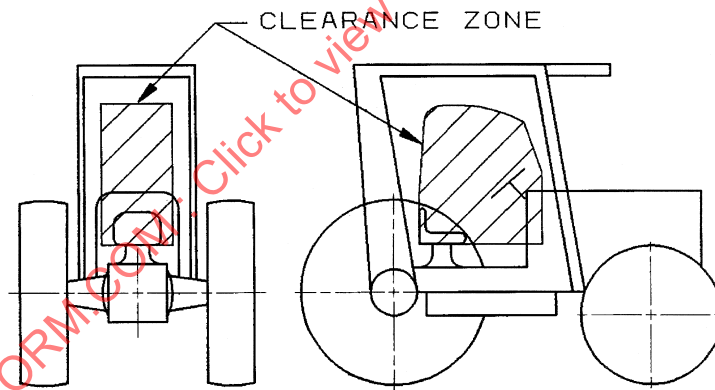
TRACTOR WITH TYPICAL OVERHEAD FRAME AND OVERHEAD COVER
